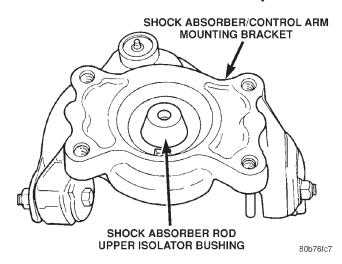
Shock Absorber Rod Upper Isolator Bushing
